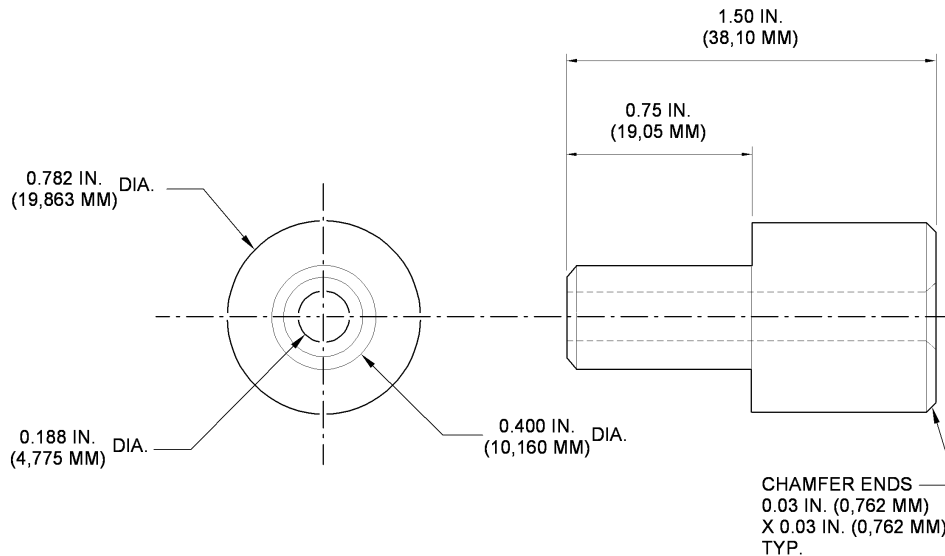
Armature Shaft Adapter, Anti-Drive End
